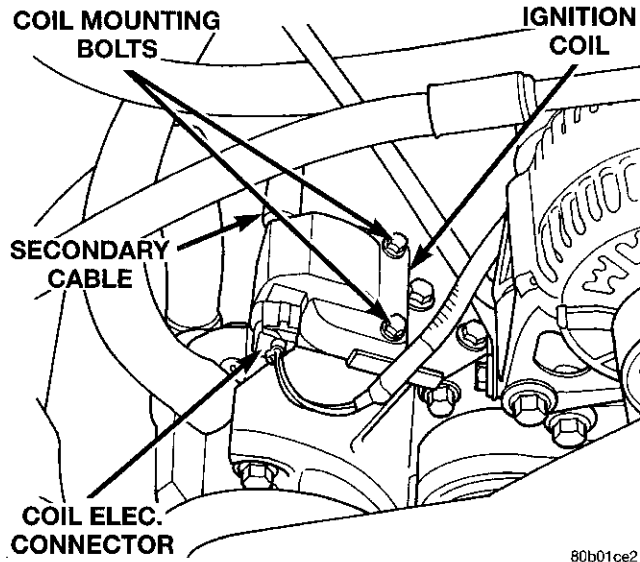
Ignition Coil—5.9L V-8 HDC-Gas Engine
